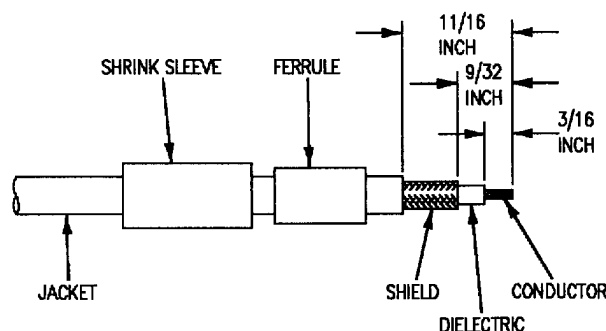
1119-079-A721 and M39012/03-0501 Coaxial Connector Repair (Sheet 2)
